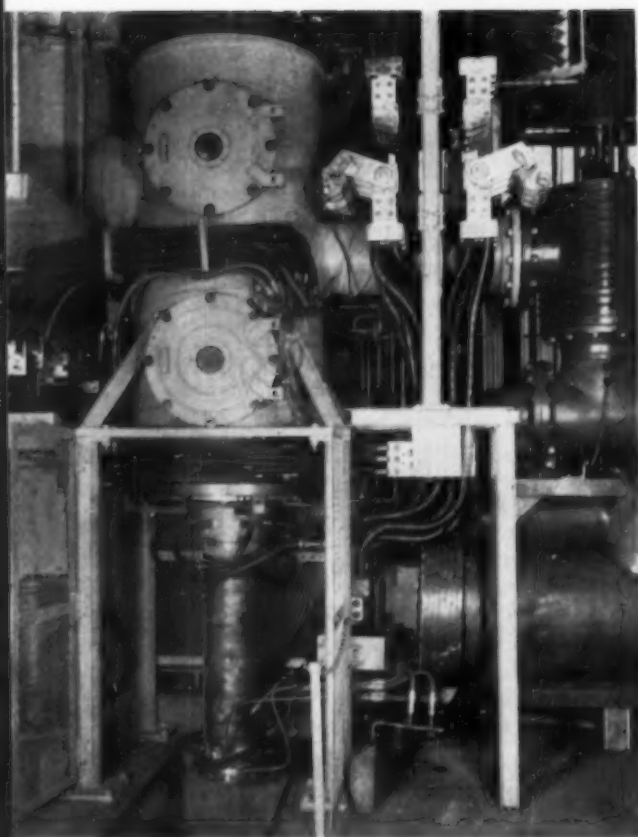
PSM 4 Furnace Ready for Operation; Cage Door Open to Show Mold. Powder feed for electrode at upper left; vacuum equipment at right
